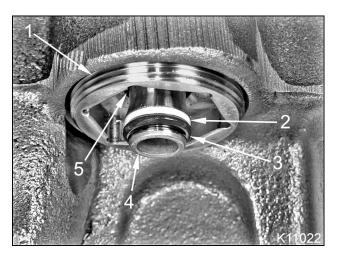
Injector oil inlet adaptor installed in high-pressure oil manifold
